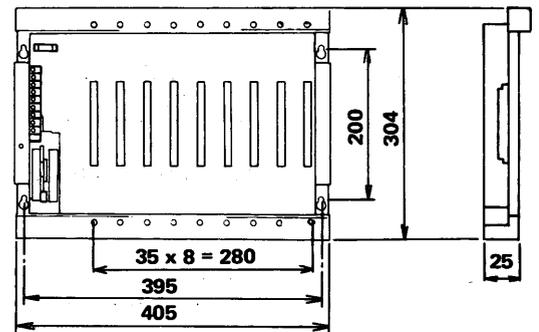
External Dimensions of K68B Extension Unit
